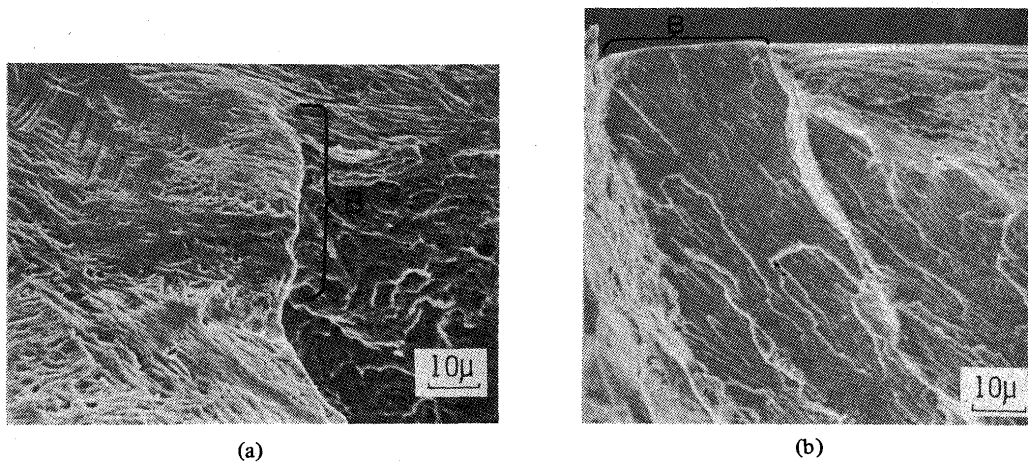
(a) Crack path and (b) mode of fracture surface in stage III' shown in Fig. 8
